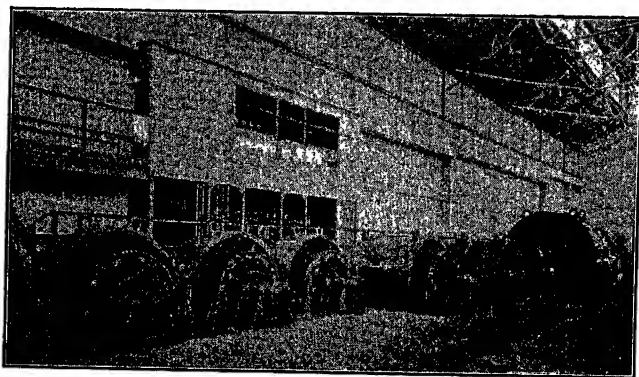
D-C. MOTORS DRIVING THE 12-IN. HOT-STRIP MILL
